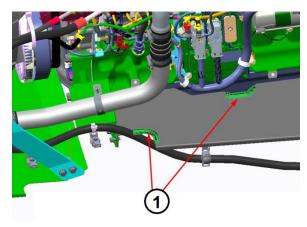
Edge Trim at Engine Shield Key 1 – Edge Trim
